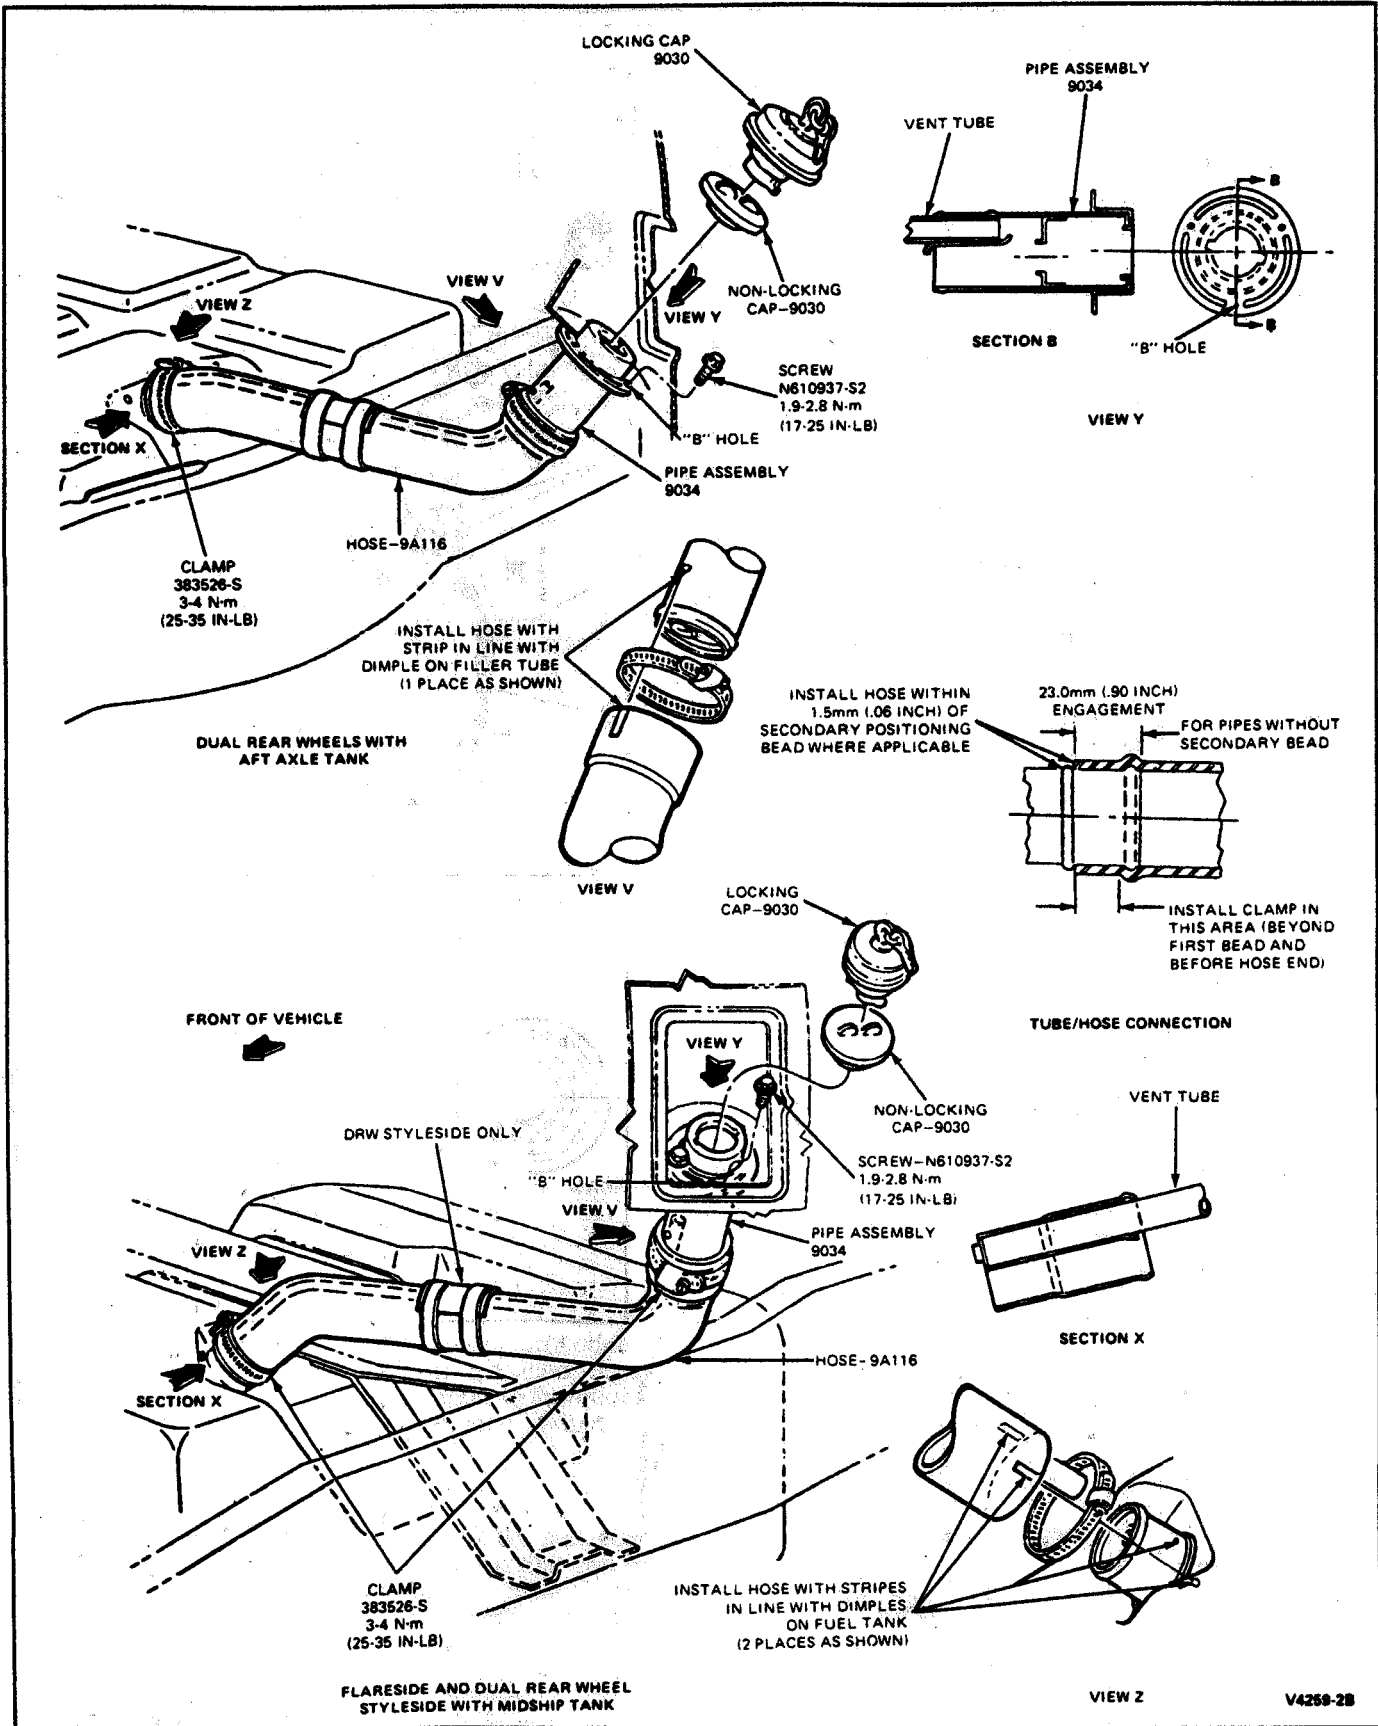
Fuel Filler System Installation—Dual Rear Wheel Styleside F-250—F-350
